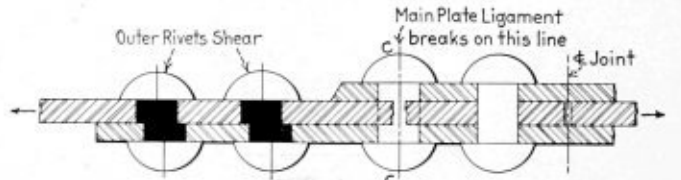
Failure of Double Butt Strap Joint by Combined Shear and Crushing; Failure (Sh + Cr)
